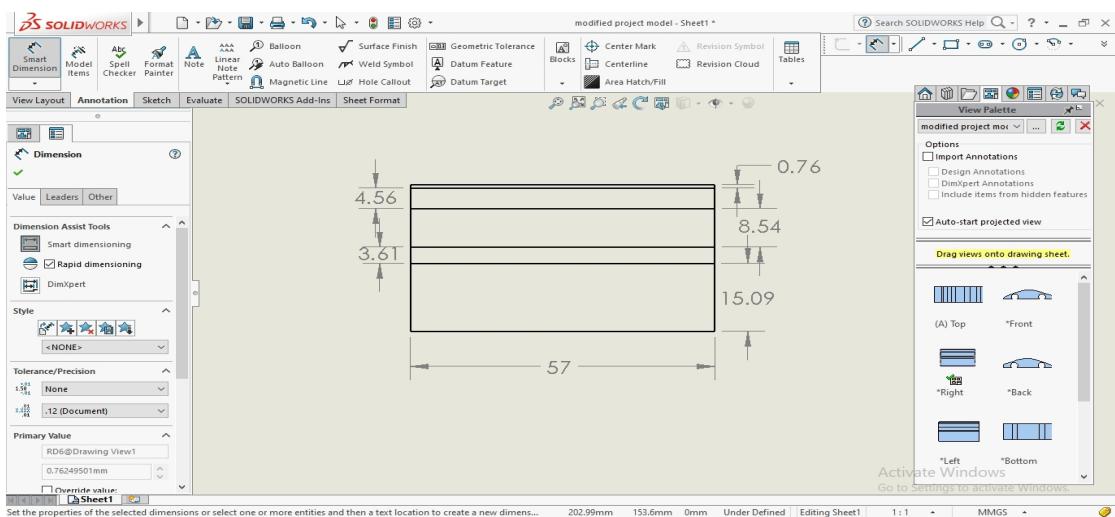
Drag Minimised Model Dimensions with Back View
